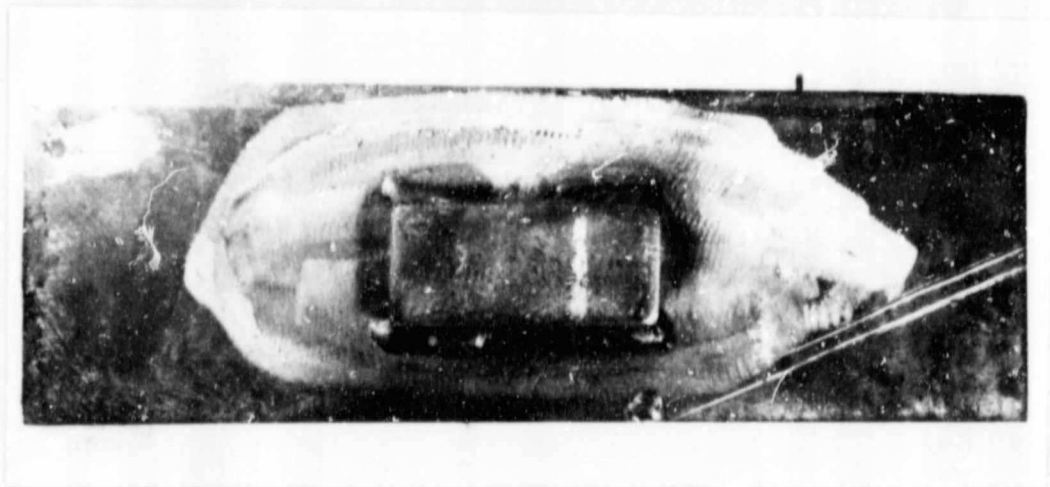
(a) Specimen simulating the old stitch welded balance pad.
